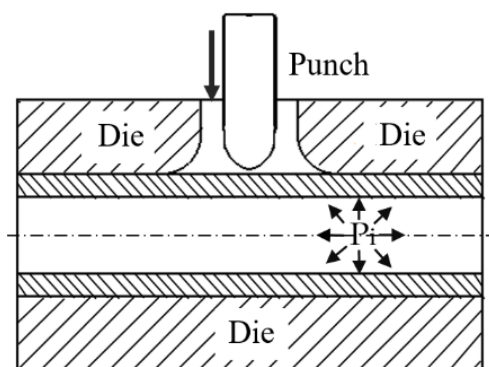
Geometric configurations of tube, die and punch in hydro-flanging.
